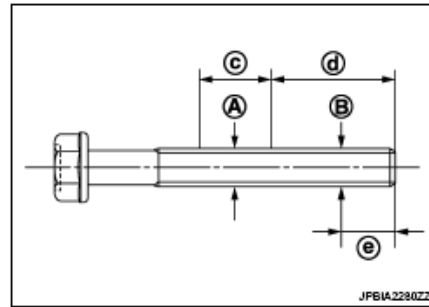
Identifying Main Bearing Cap Bolt Outer Diameter
